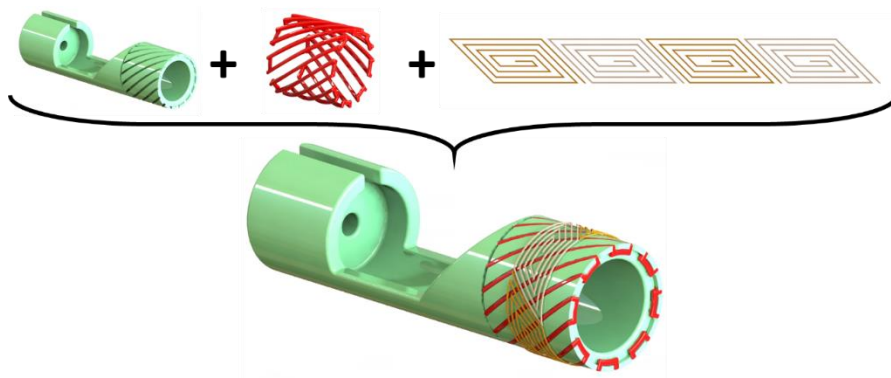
Components required for the EC probe assembly as presented in §3.4: 3D printed chassis; complex twisted excitation coil; sensitive coils array.
